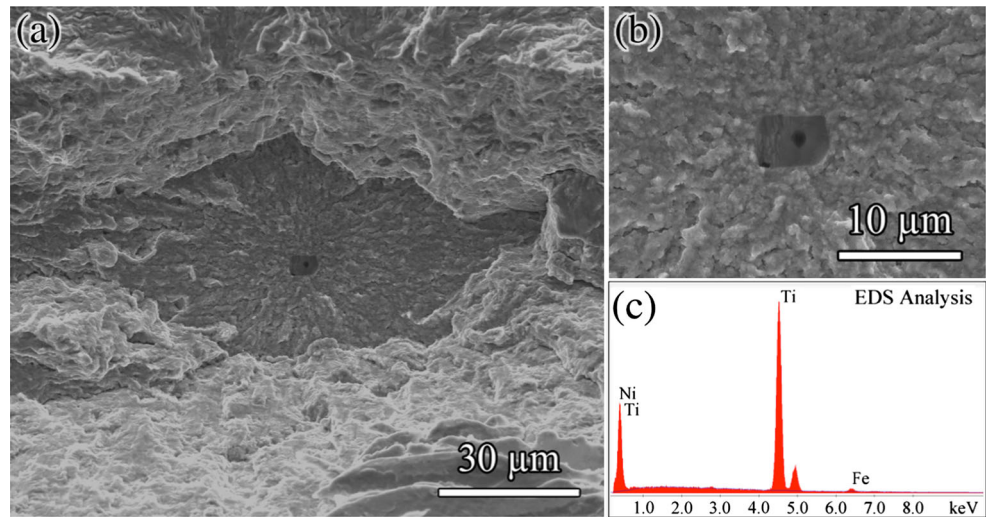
Fatigue crack initiation at an internal aluminate-inclusion in material B; $\Delta\sigma/2 = 495$ MPa, $N = 3.9 \times 10^7$ cycles; a fracture surface; b detail of the crack initiating inclusion; c EDS analysis of the crack initiating inclusion.
